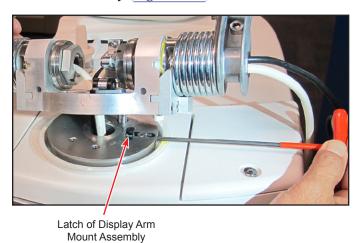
Push and Hold The Latch of Display Arm Mount Assembly
